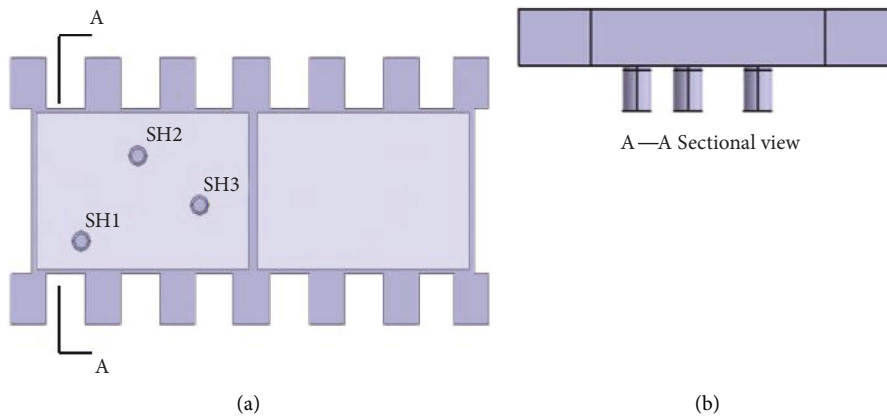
Illustration of the thin-walled workpiece with three support heads. (a) Front view. (b) Sectional view.
